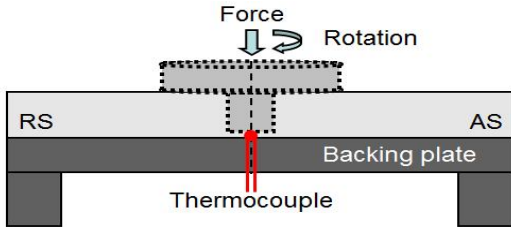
Measured method of welding temperature and location of thermocouple during FSW process
